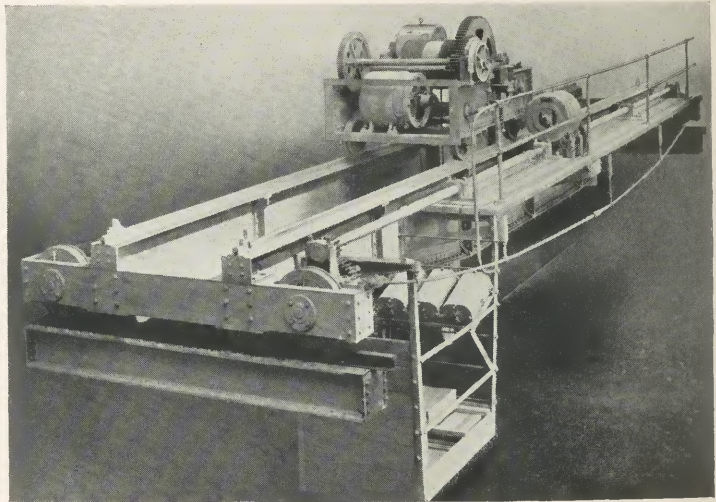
10-ton Three Motor Electric Overhead Travelling Crane.
